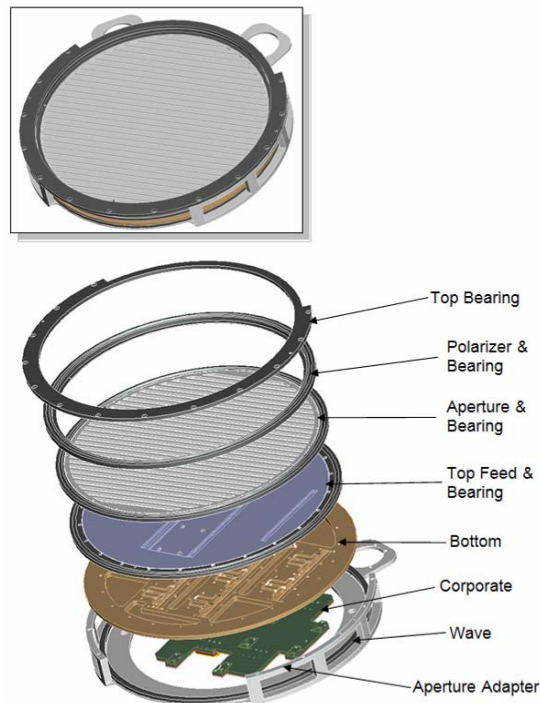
Exploded Diagram – Typical VICTS Assembly
